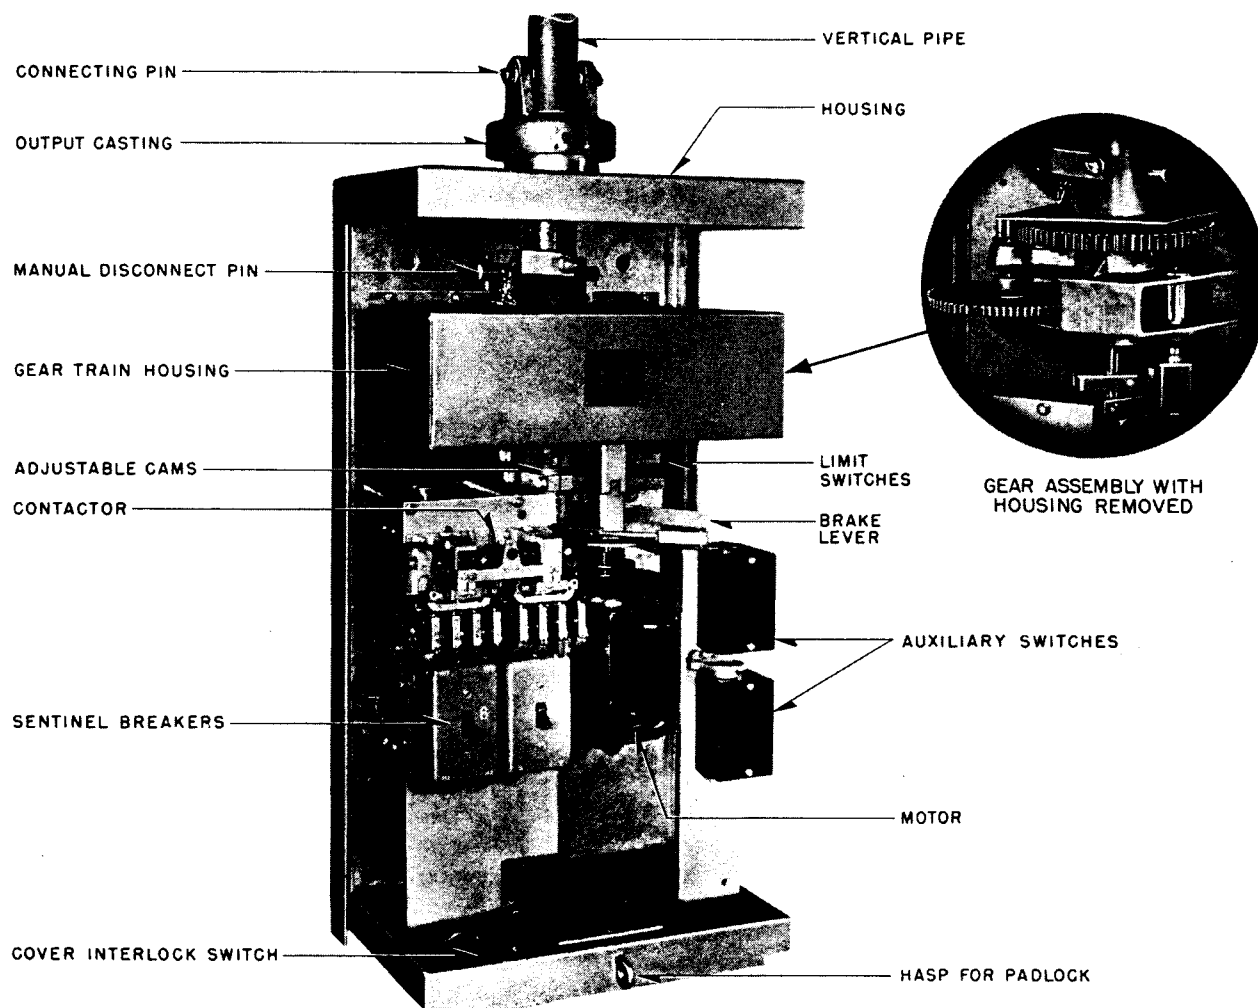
Type T-3 Motor Operating Mechanism with Cover Removed
